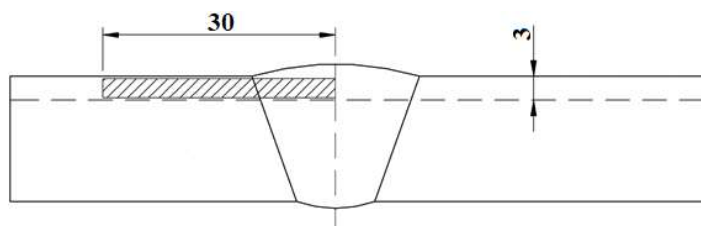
Cut out procedure of the corrosion test specimen.
